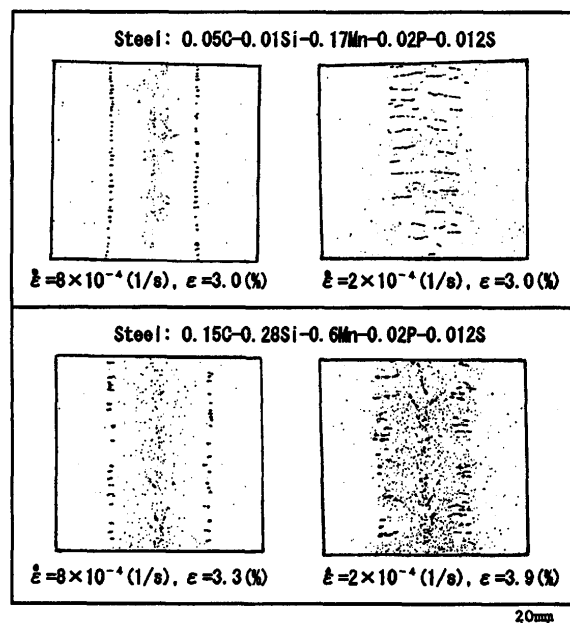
Internal cracks by sulfur print of longitudinal cross section of ingot.
